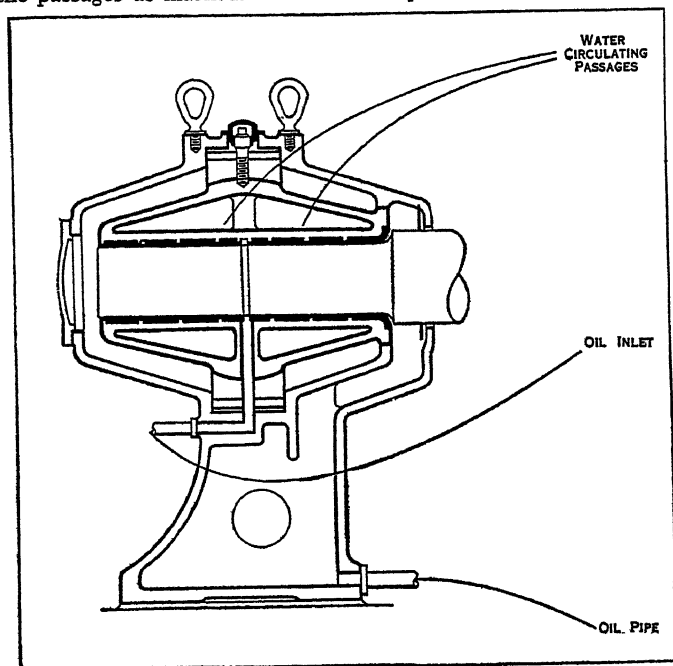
A HIGH SPEED BEARING FOR THE SHAFT OF A TURBO ALTERNATOR
